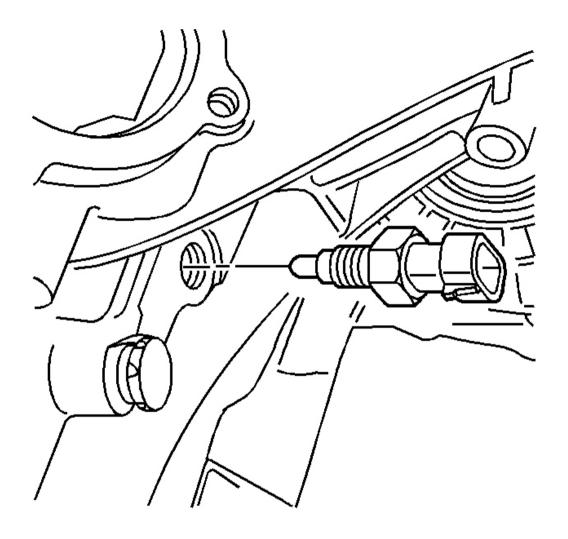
View Of Reverse Lamp Switch Courtesy of GENERAL MOTORS CORP.
